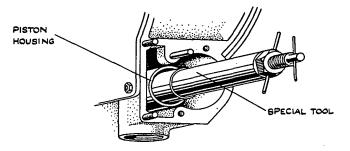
Withdrawing the piston housing showing extractor tool Churchill L182 in position
